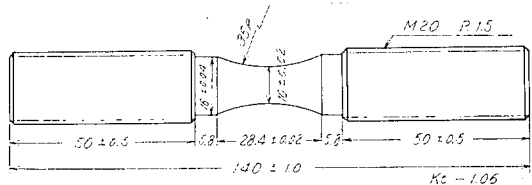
Details of Hour-Glass Shaped Specimen
